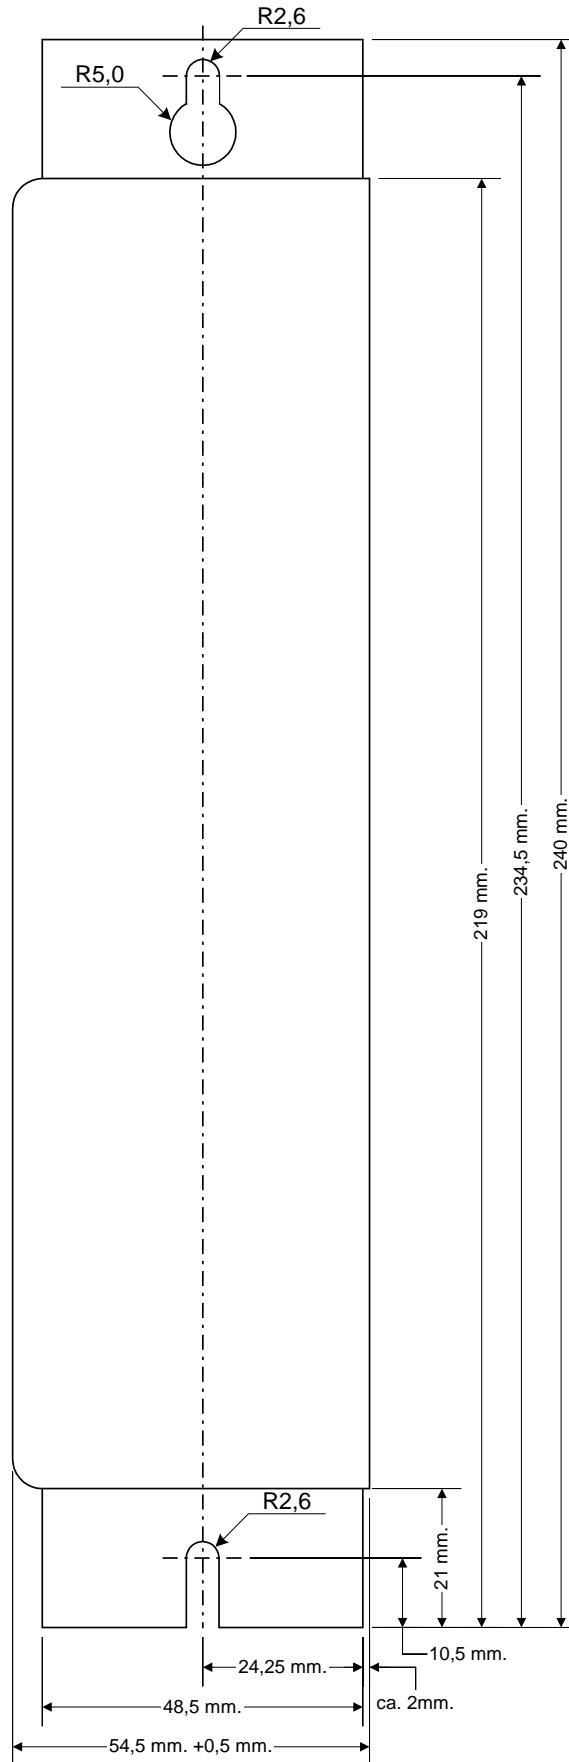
Servo positioning controller ARS 2100: Mounting plate
